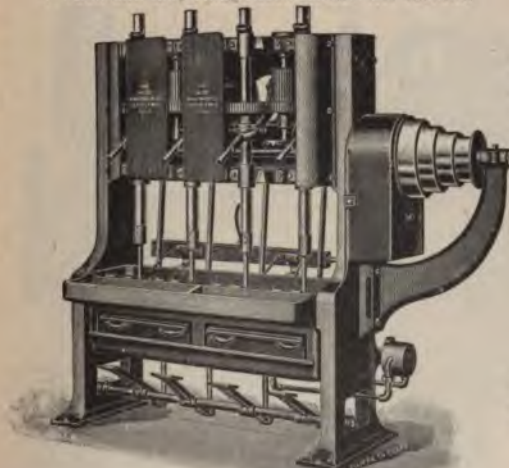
SHOWS FOUR SPINDLE MACHINE.
